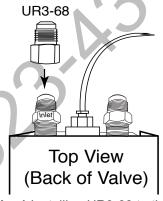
Installing UR3-68 to the inlet or outlet side of gas valve
